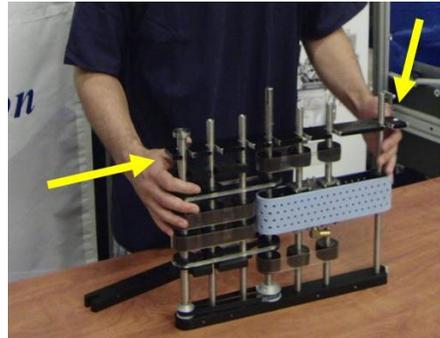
Use Carriage Jig to hold all shafts in place and slide carriage holder back in place.
